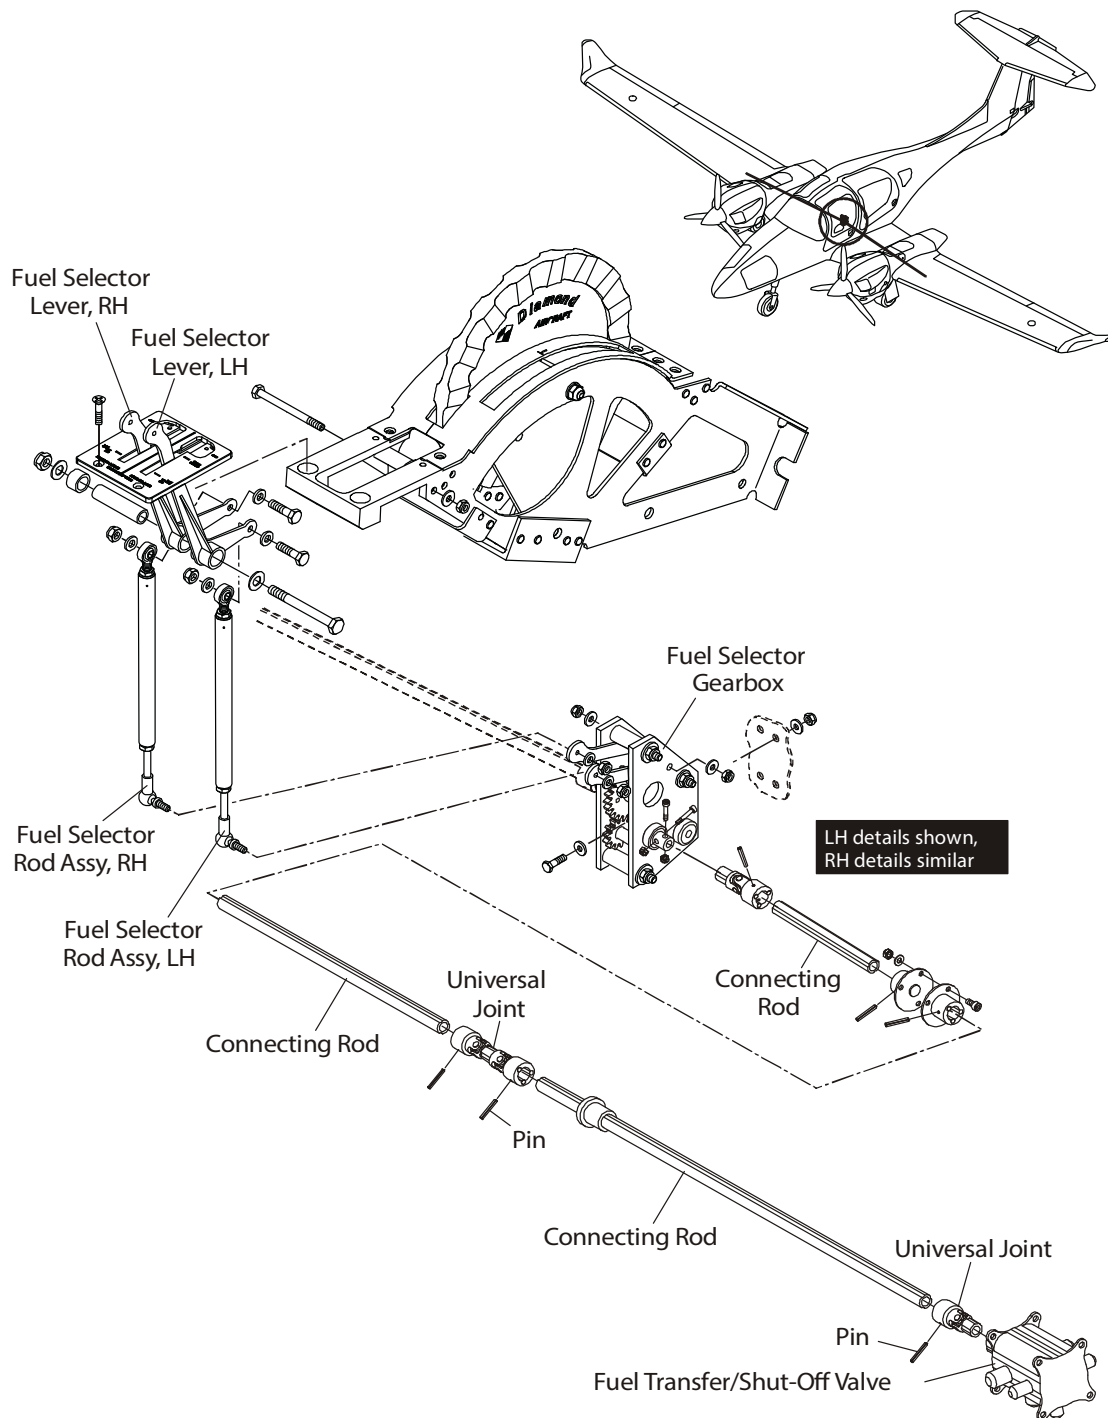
Fuel Transfer/Shut-Off Valve Installation
